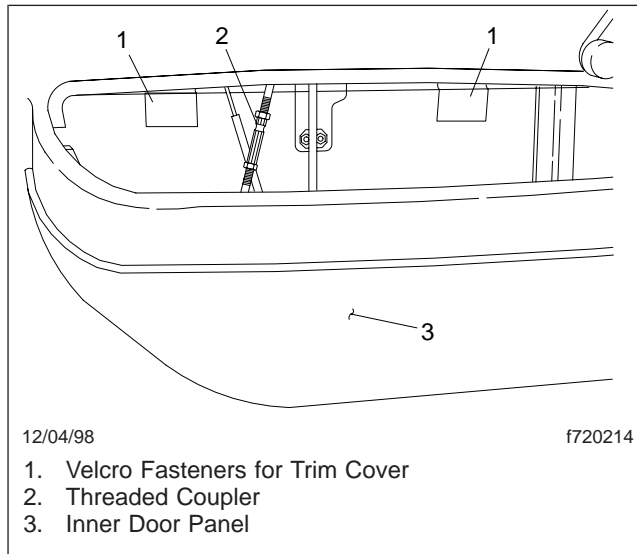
, Threaded Coupler for Interior Handle Adjustment
